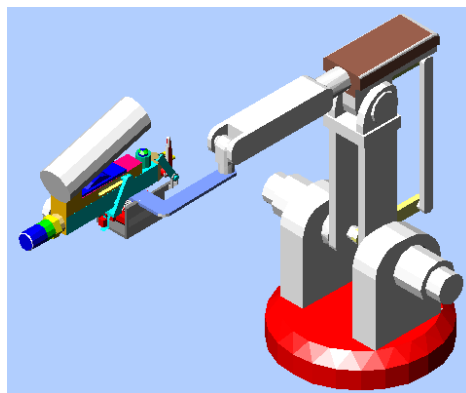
Robot arm with the automated combustion powder thermal spray gun attached.
